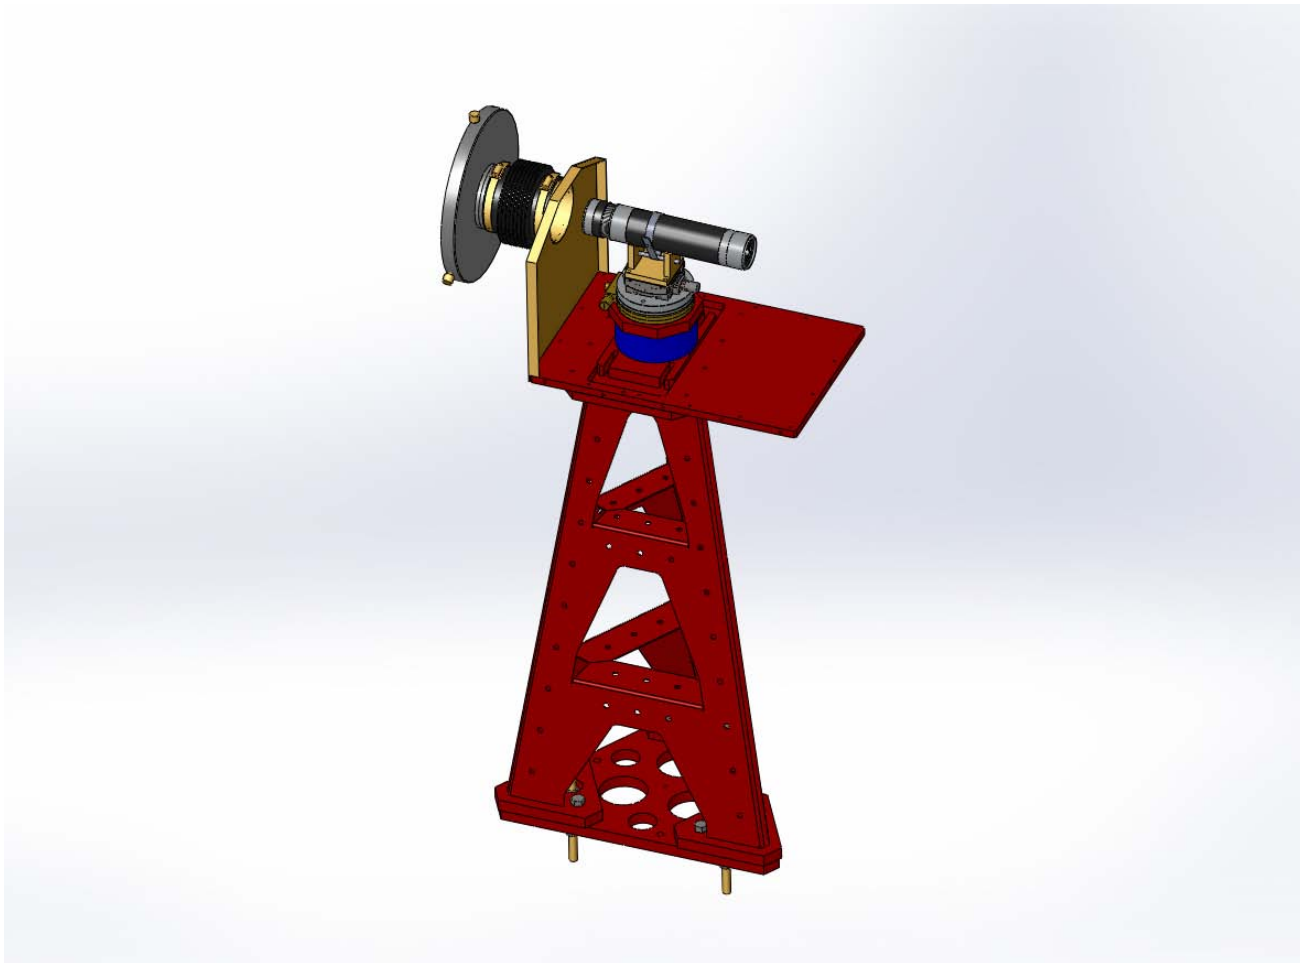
ITM/ETM Transmitter Pier Assembly. Shown with cover removed.
